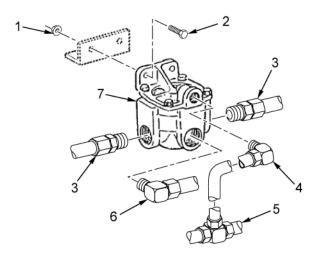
Location K, Pipe Sealant Compound to Male Threads Installation.
